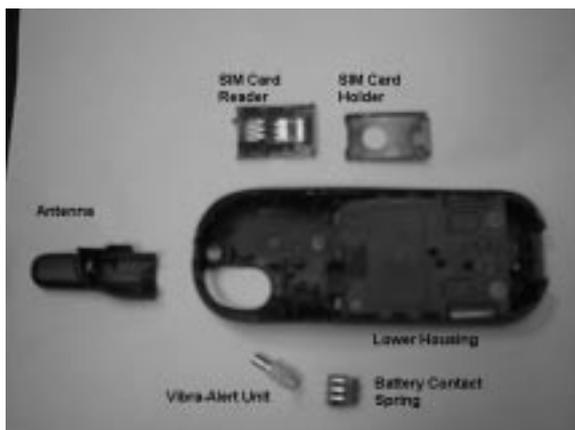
Disassembly Lower Housing – STEP 2
